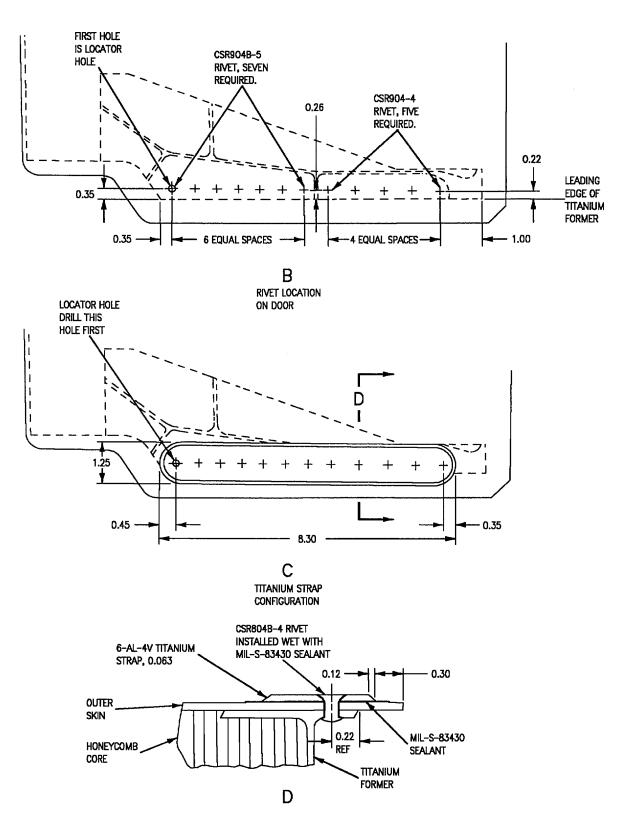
Main Landing Gear Outboard Door Leading Edge Outer Skin Repair (Sheet 2)
